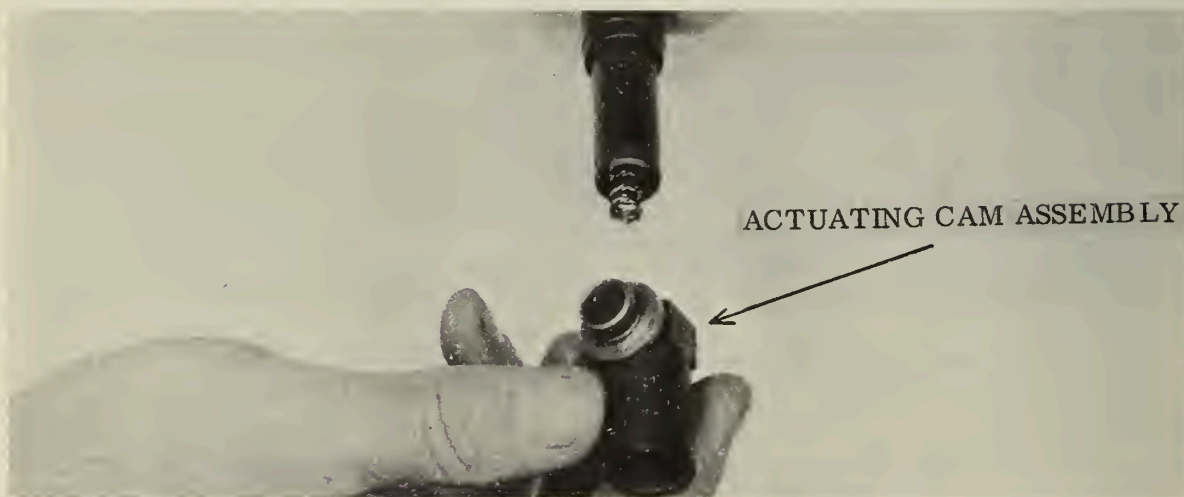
Removing/Replacing the Actuating Cam Assembly.
